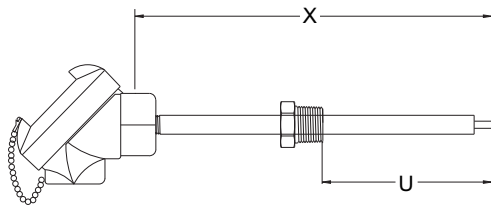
RUGGEDIZED BULLET NOSED HARDENED TOOL STEEL WITH CARBIDE TIP
